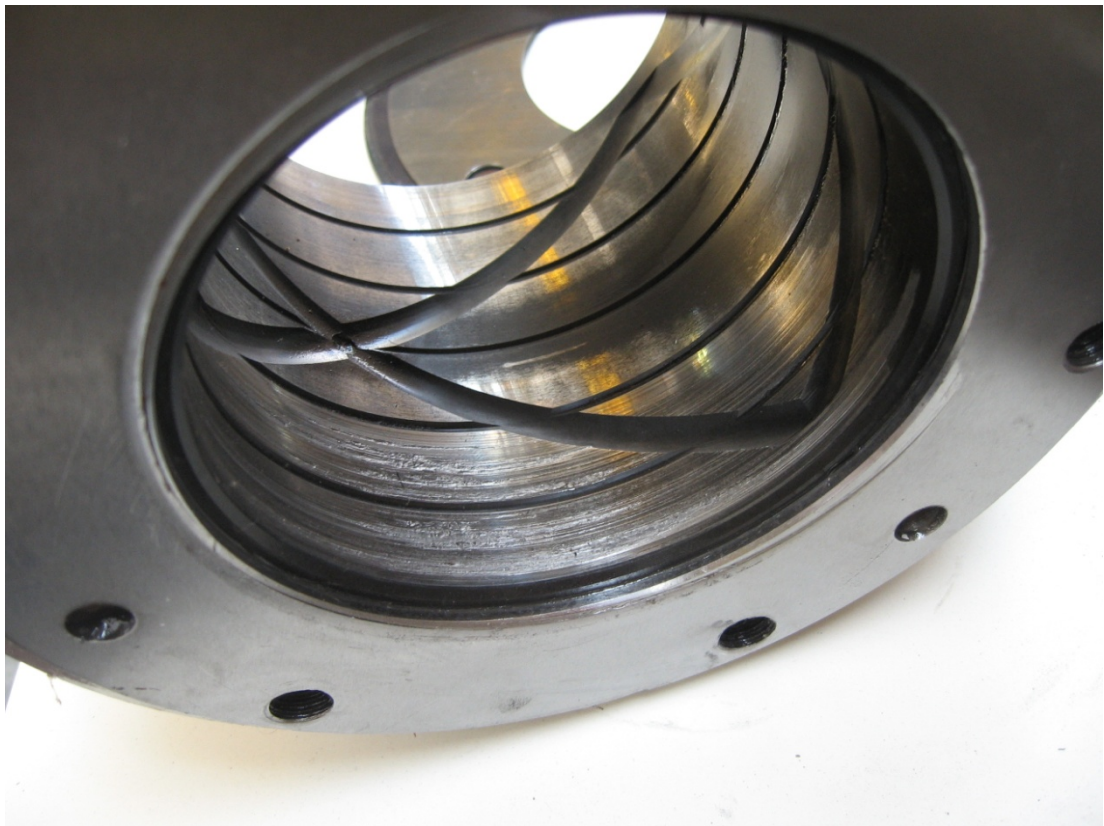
Seizure region on the bearing for the 3rd test bearing
